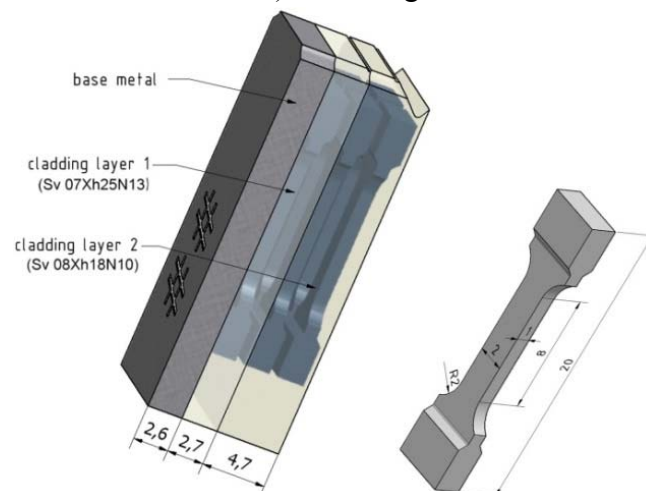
Scheme of the machining of sub-size tensile specimens from broken halves of Charpy size SE(B) specimens.
